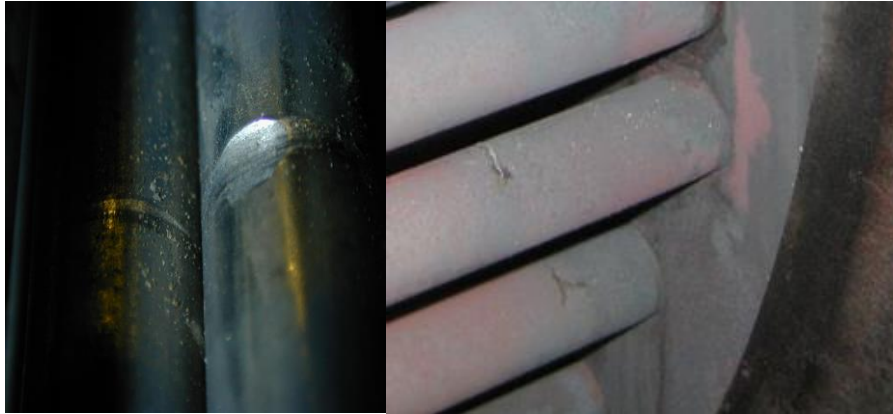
Pitting corrosion<sup>6</sup>
